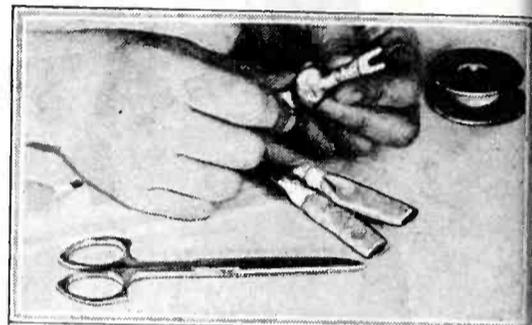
Finishing the job. When tubing is pulled back, terminal is exposed.
